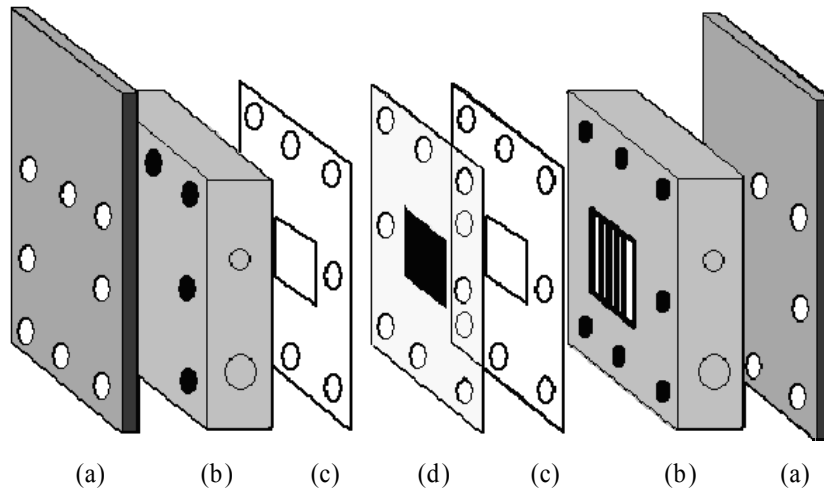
Exploded view of a PEM reactor: (a) copper plate, (b) graphite block with flow channel, (c) silicone gasket, (d) MEA [16].
